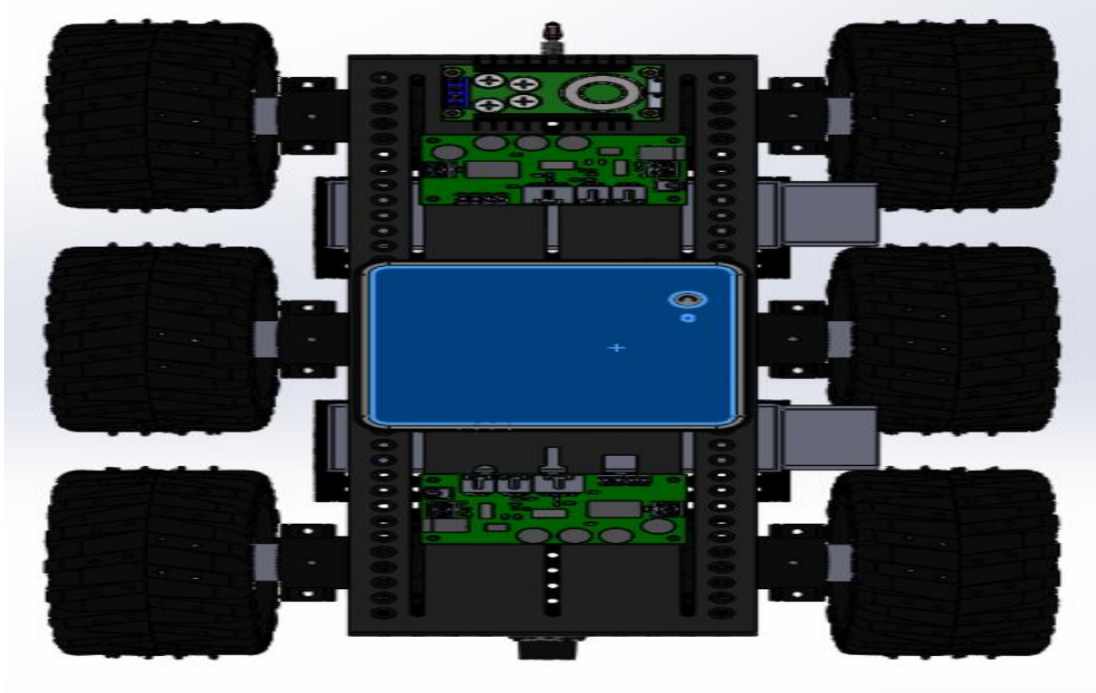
Top view of 3D Rover Assembly (Dead Reckoning)
